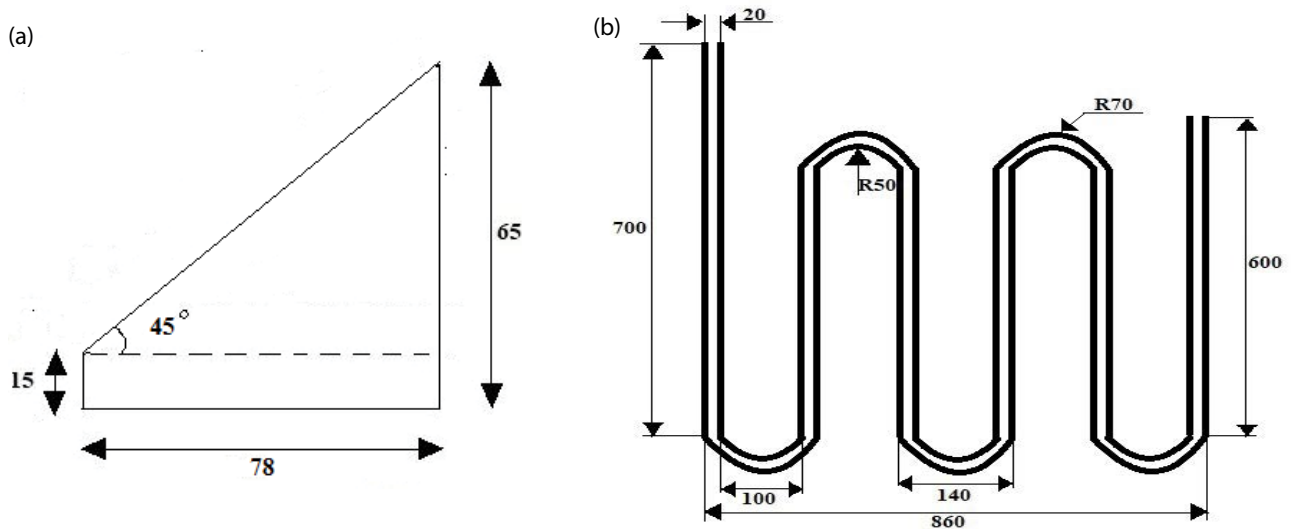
Dimensions of (a) solar still in cm and (b) heat transfer pipe in mm.
